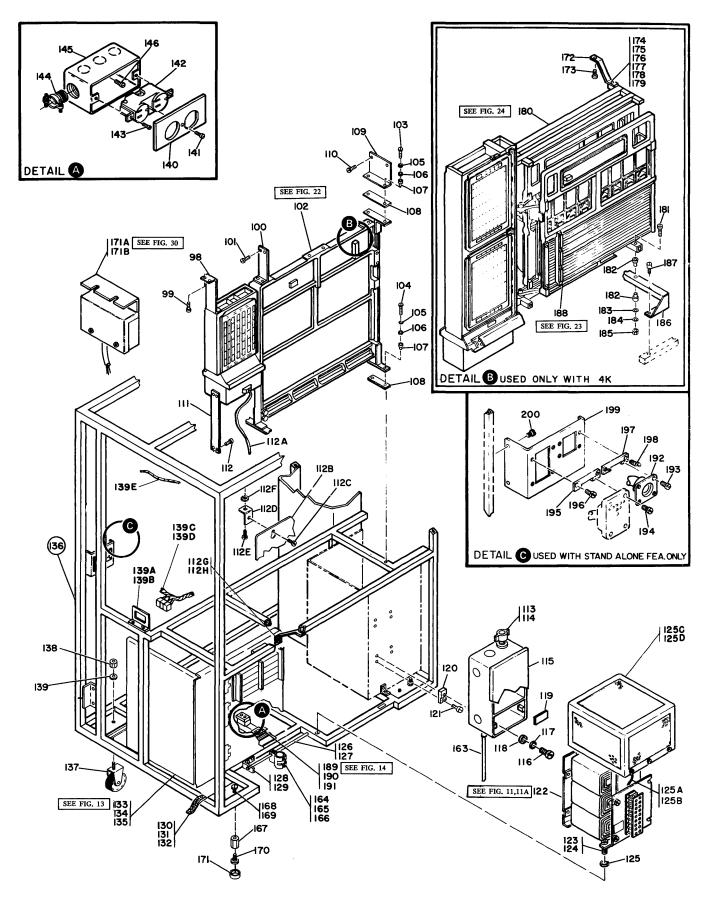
2314 FINAL ASSEMBLY. FRONT VIEW. (Sheet 2 of 2. Index No. 98 thru 146, and 163 thru 200) SEE LIST 2.
